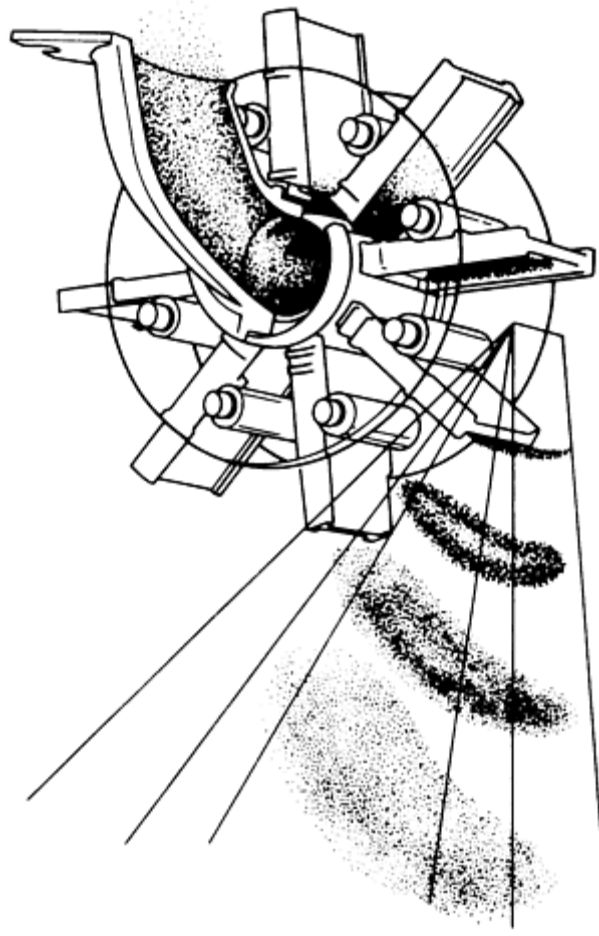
Blade-type airless centrifugal abrasive blast wheel
